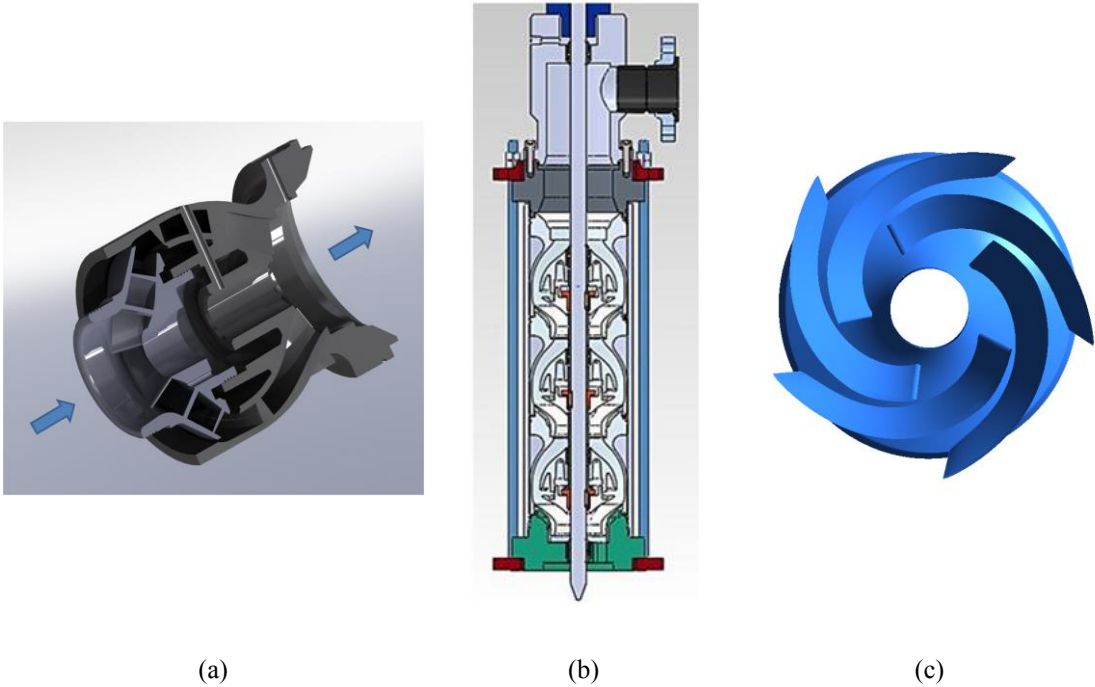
(a) Cross section of a single stage ESP with impeller and diffuser (b) Three-stage ESP pump (c) ESP impeller
